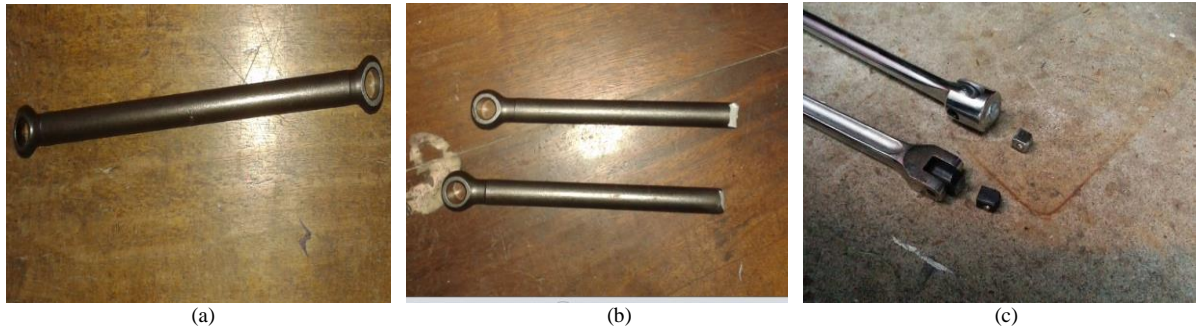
(a) Simple shaft; (b) Broken drive shaft; (c) Broken drive shaft edge.
